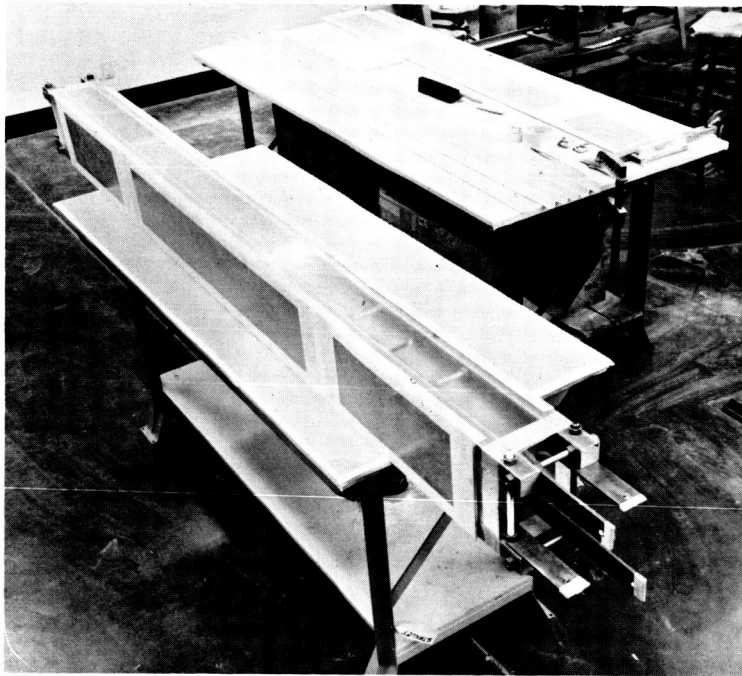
Fiberglass Reinforced Box Beam Assembly Fixture, Showing a Shear Web and Two Assembly Angles in Position
